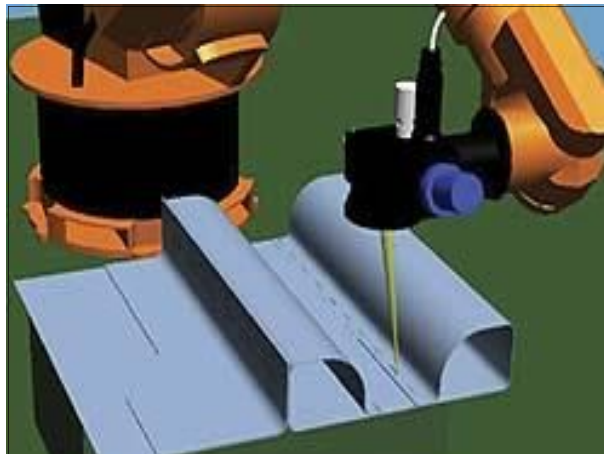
Principles of Laser Stitch Welding process
